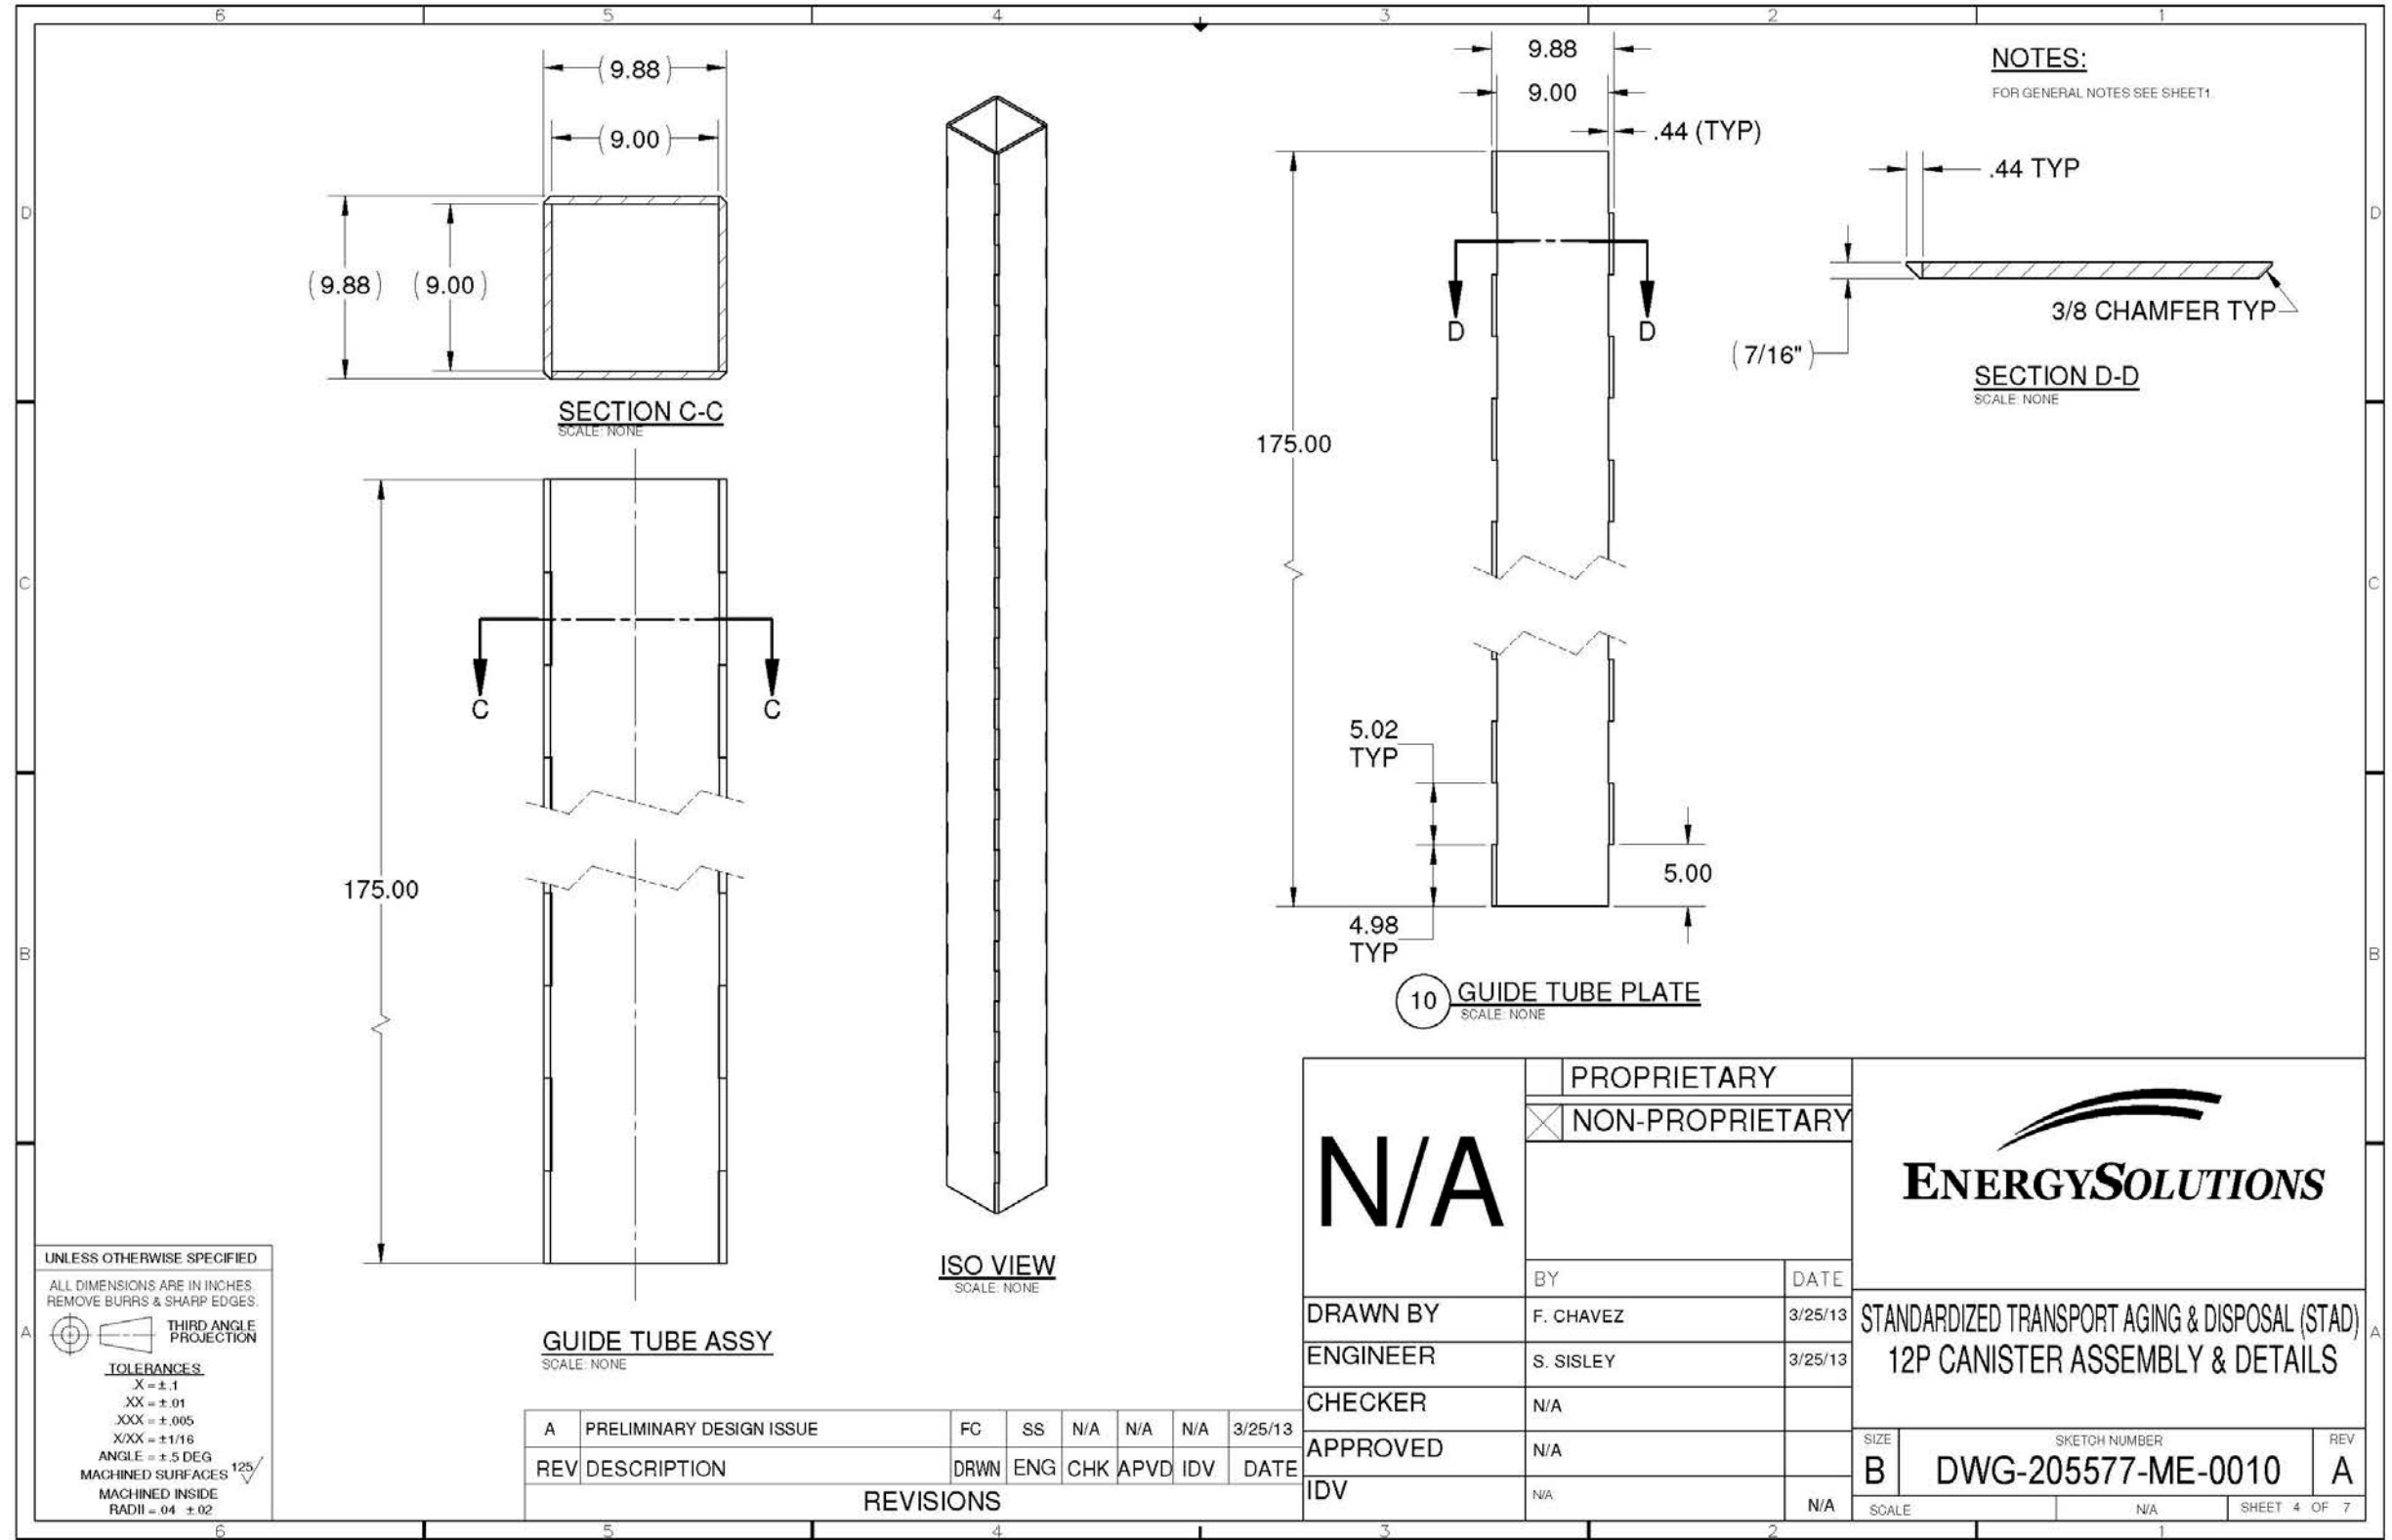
Standardized Transport, Aging and Disposal Canister - 12 PWR Assemblies - Assembly & Details – Sheet 5 of 7
